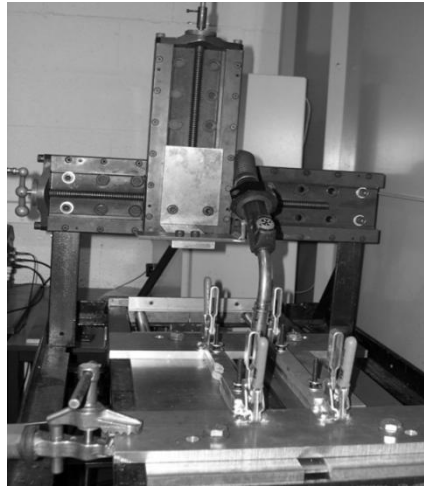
View of the rig used for welding thin sheets.
